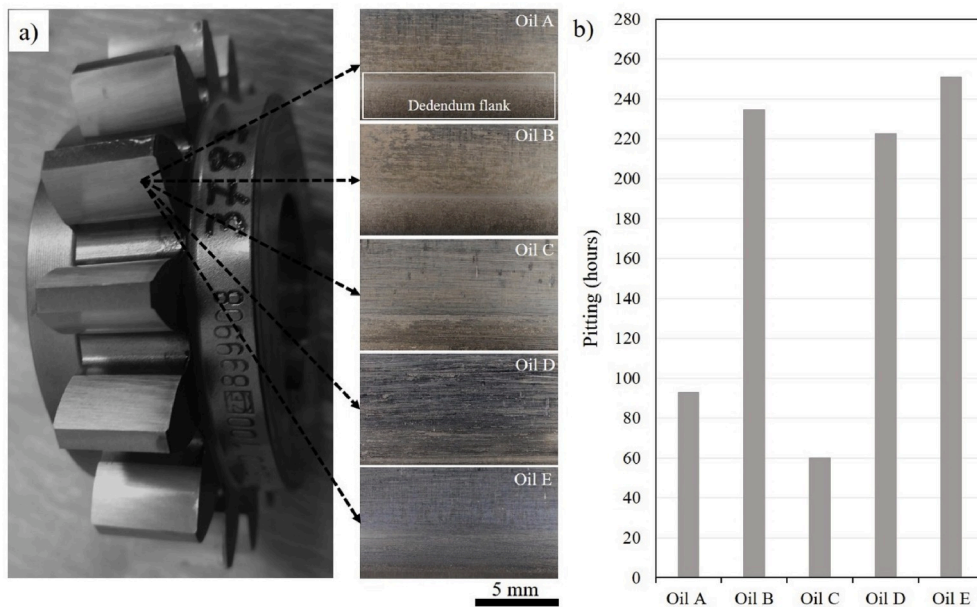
a) Micro-pitting failures observed by light optical microscope on the flanks of the pinion spur gears tested using the FZG back-to-back gear test rig with the lubricating oils A to E and b) test hours until occurrence of pitting failure.
